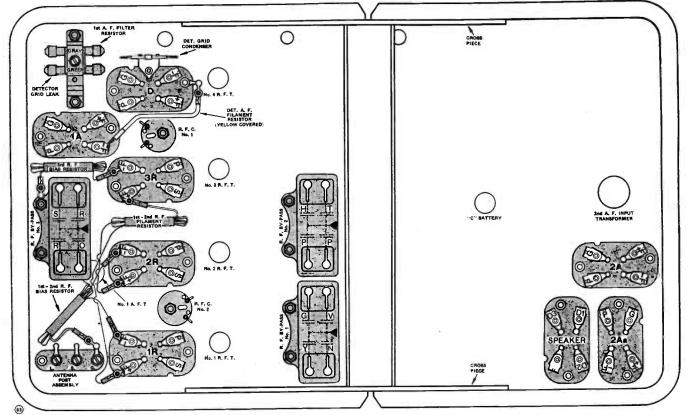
BOTTOM VIEW OF TYPE Q CHASSIS.
